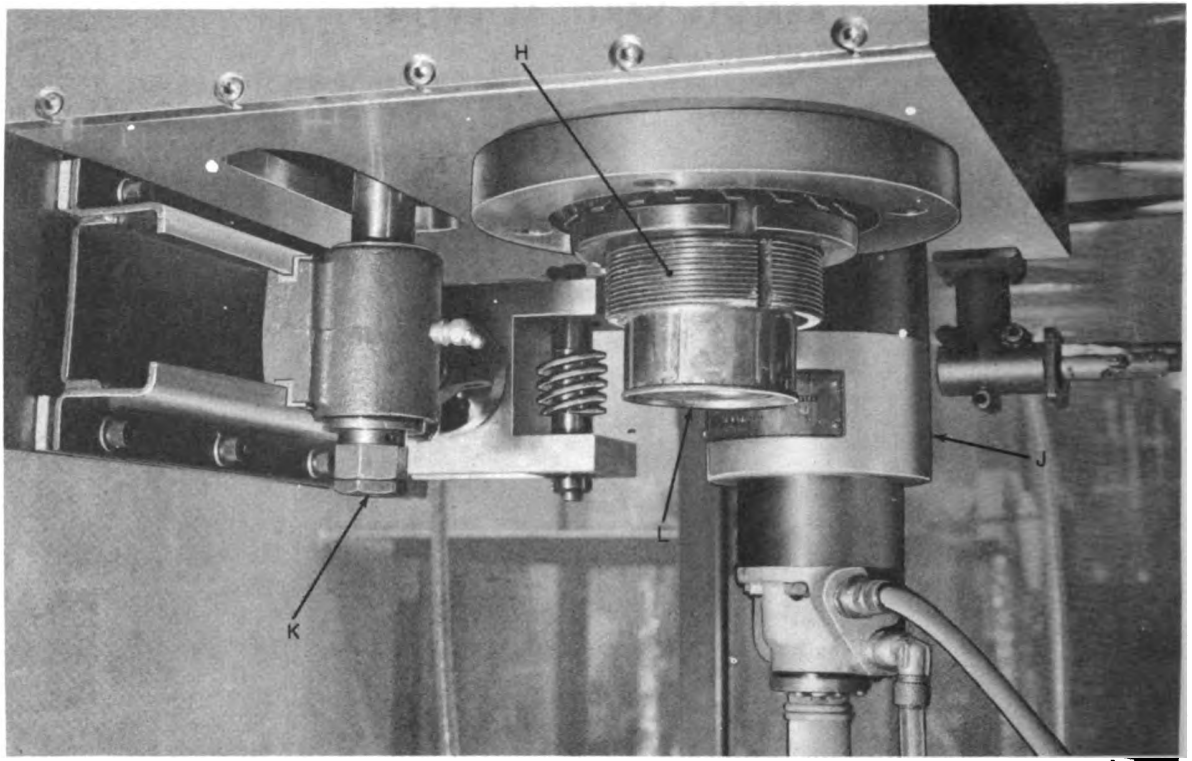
Lathe assembly, lower side. *H*, chuck assembly; *J*, air motor; *K*, tension-control assembly; *L*, can.
